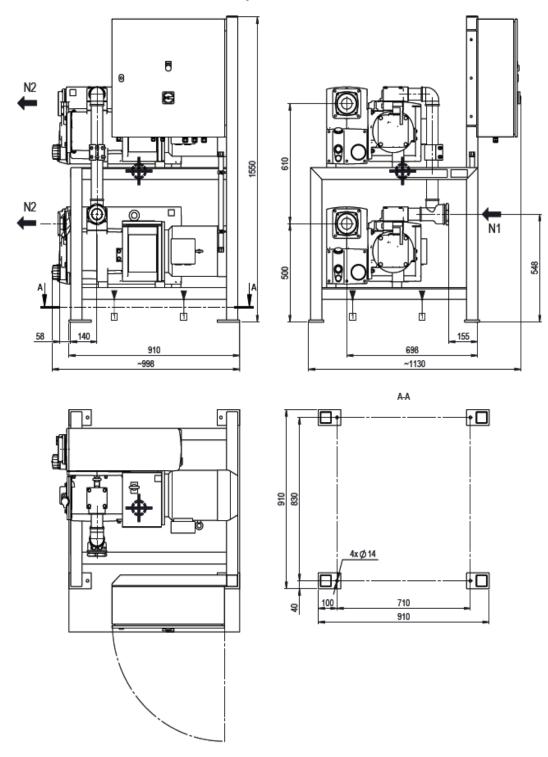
Dimensions of the vacuum system DUPLEX VRD 2072
